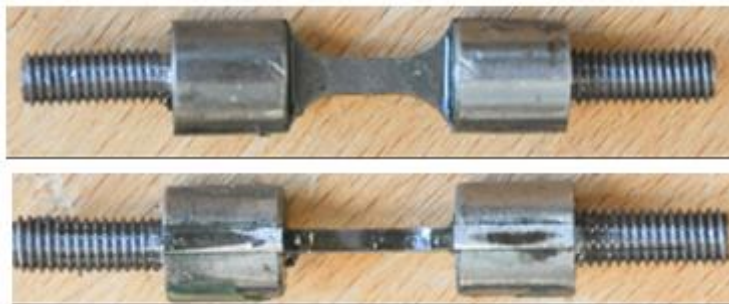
Assembly of specimen and fixture for tension testing of thin sheets at high-strain rates.
